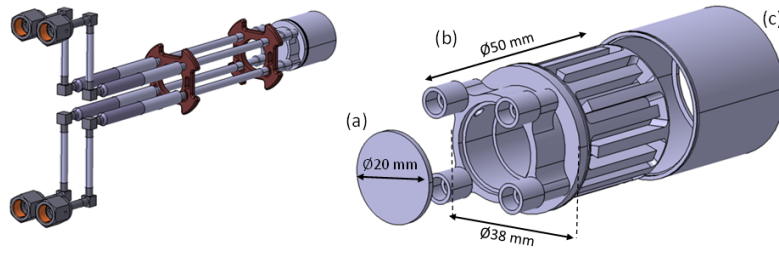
CAD model of cold moderator assembly (left) and exploded view of cold moderator vessel (2) with shell (3) and lid (1) (right).
